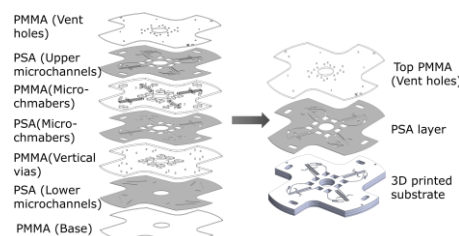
The left panel is the exploded view of the disc fabricated by traditional approach. The right panel represents the exploded view of the disc fabricated by 3D printing approach
